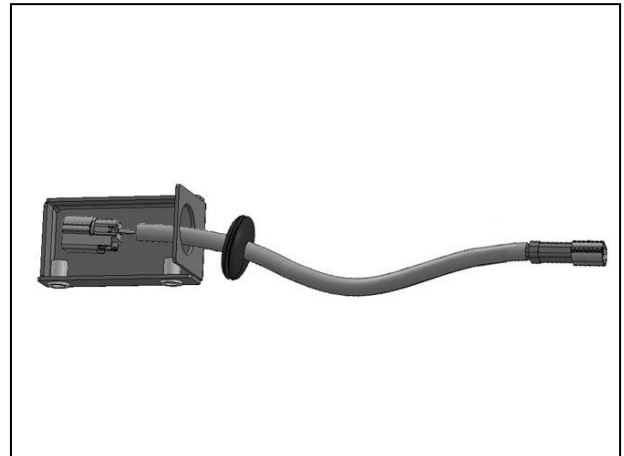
Slide Rubber Grommet onto end of Wire Harness Extension
